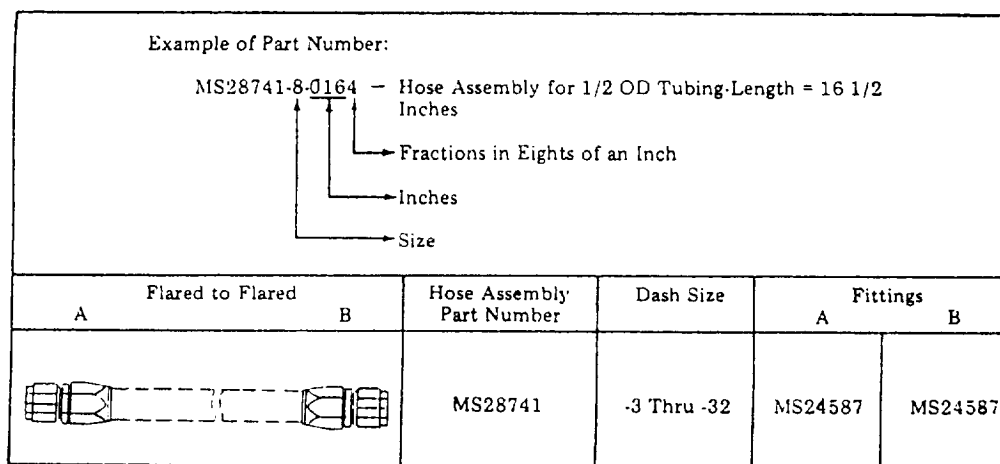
Synthetic rubber medium-pressure hose assembly.
